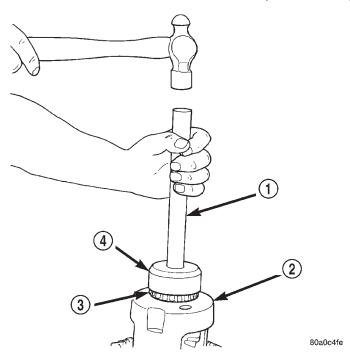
Install Differential Side Bearings—8 1/4 Axle
